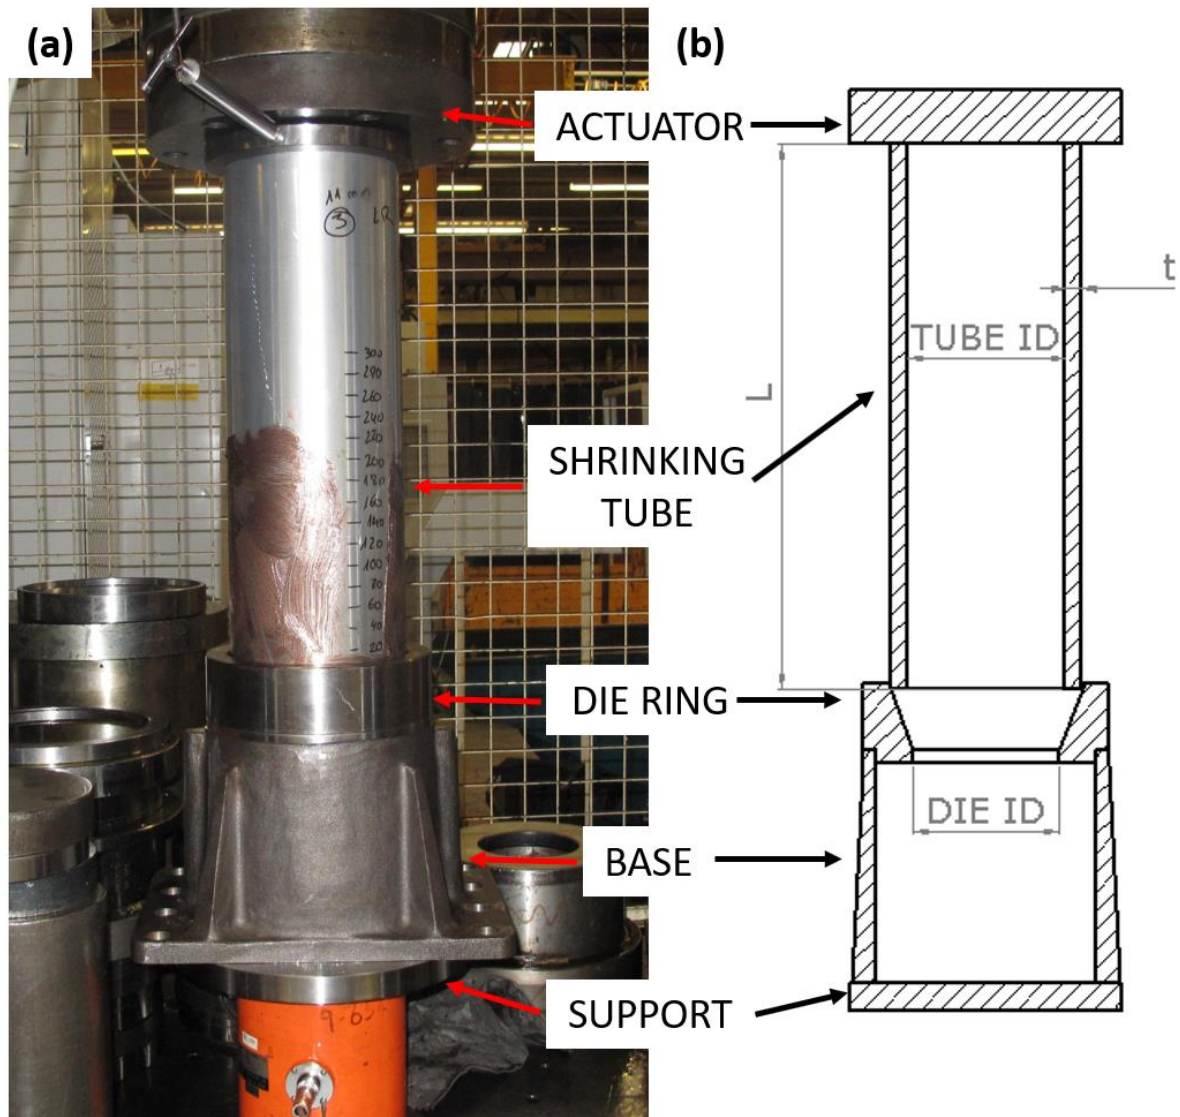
(a) Test rig and specimen assembly; (b) schematic diagram of the experimental setup.
